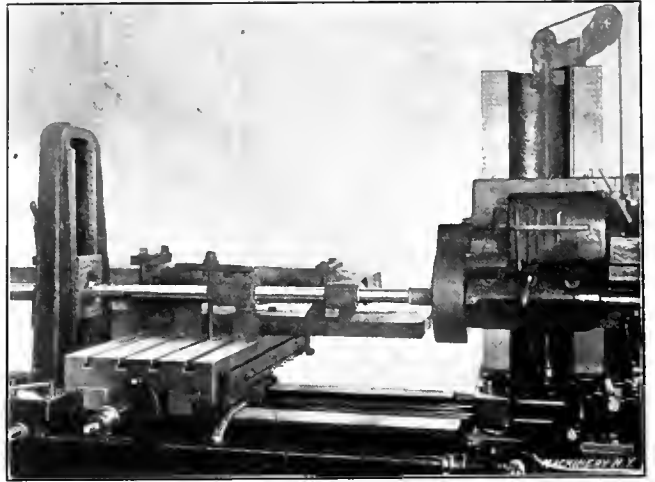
Bearings for Crown Gear and Spindle Sleeve being bored
